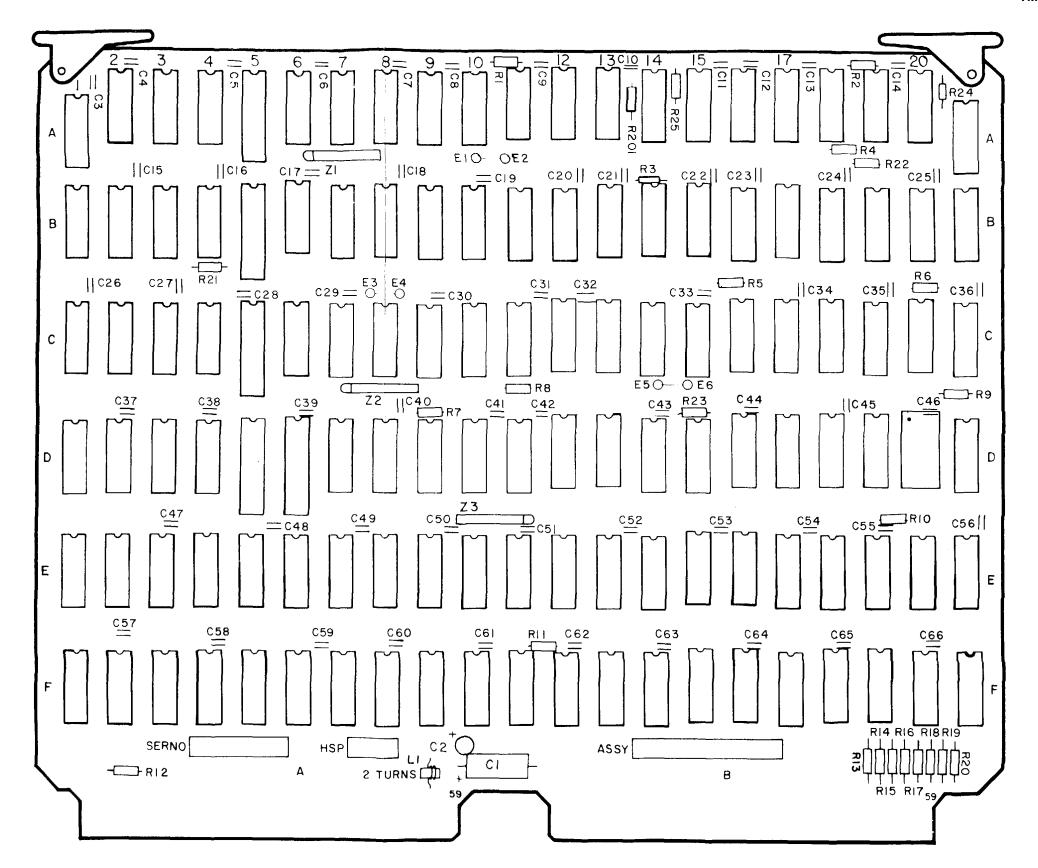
Pin Processor Board 0100-2704 Assembly Drawing
